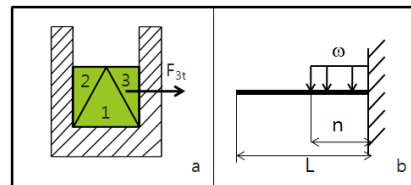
a) Uncut chip cross section dividing solution; b) Cantilever beam modelling
